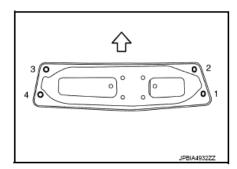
Identifying Rear Engine Mounting Member Bolts With Tightening Sequence Courtesy of NISSAN NORTH AMERICA, INC.
